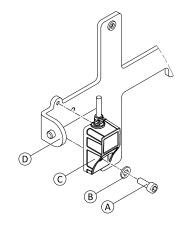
Example of G-Trac sensor on LiNX system (power module not shown).
